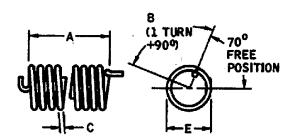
Printer Springs, Outline Drawing (Sheet 1 of 2)
